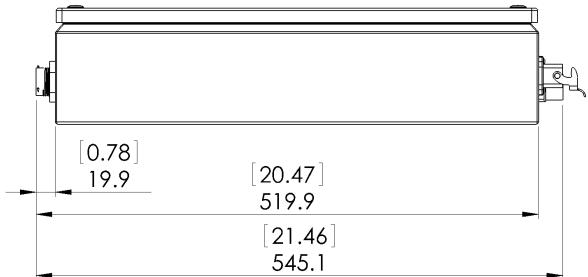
RE08 Control Enclosure Mechanical Dimensions
